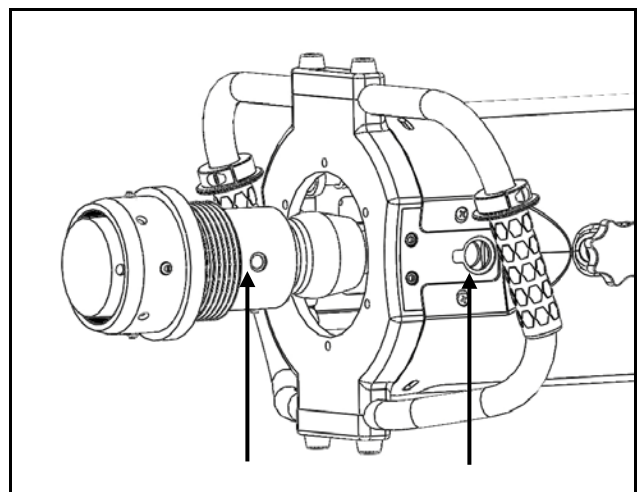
Piston/Impactor Sub Assembly Reinstallation
